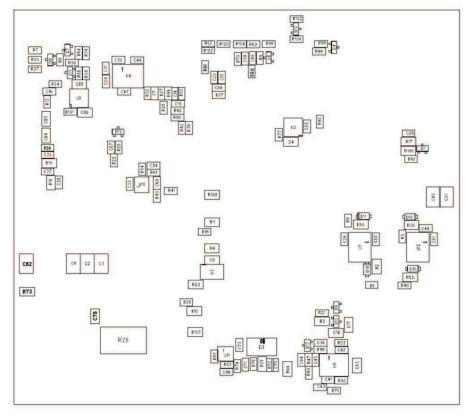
UCD3138HSFBEVM-029 Bottom Assembly Drawing (bottom view)
